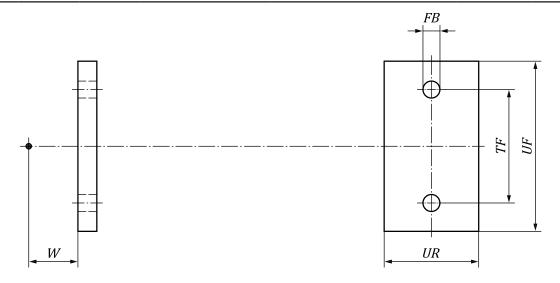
Head rectangular flange (two hole) mounting (MF8)
